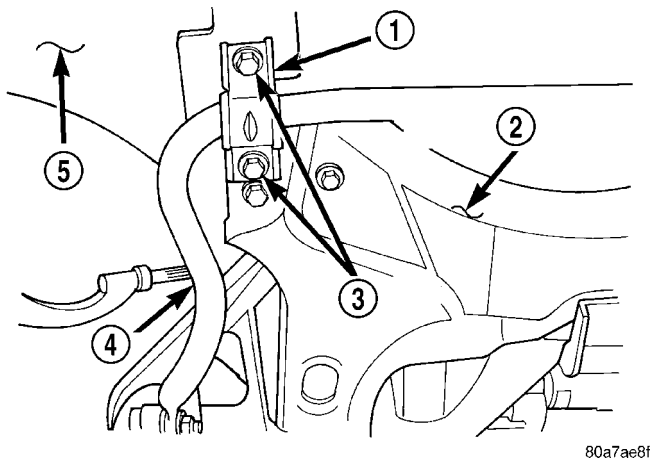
Stabilizer Bar Bushing Clamp Attaching Bolts
